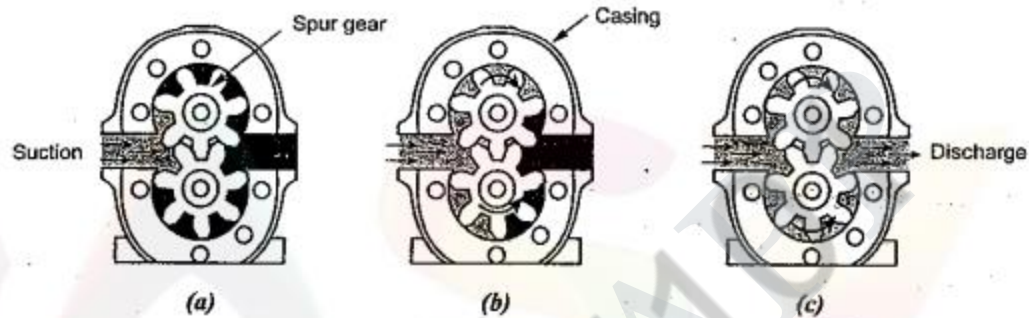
Operation of external gear pumps : (a) Vacuum draws fluid into pump. (b) Teeth carry fluid through pump. (c) Fluid is discharged under pressure.
